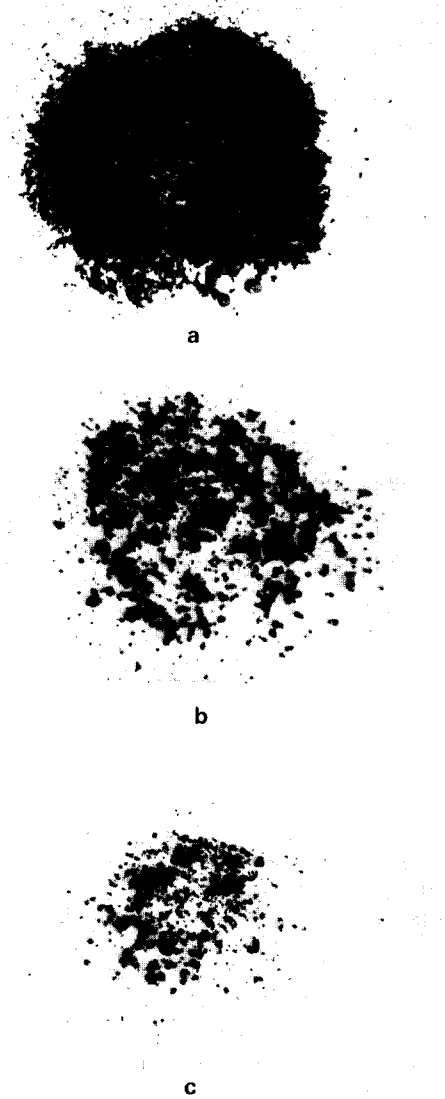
Amount of spatter according to shielding gas in MAG welding
